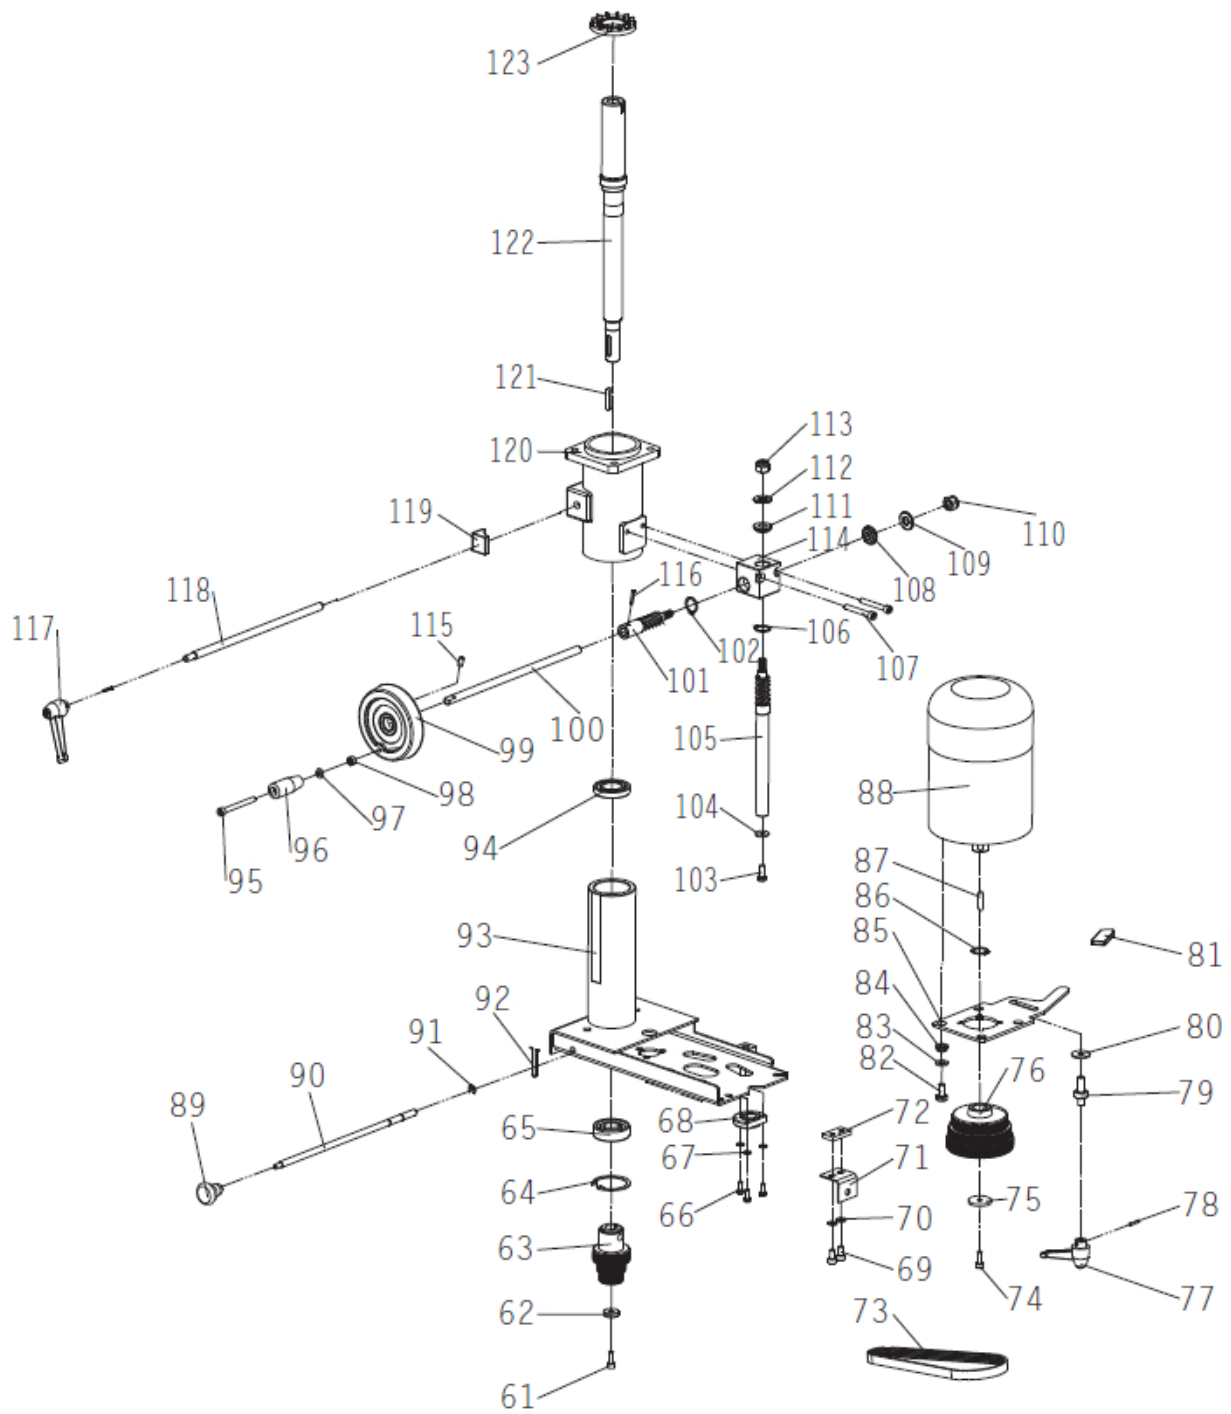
Spare parts drawing 2 - Spindle Moulder TF 170 E (230 V and 400 V)
